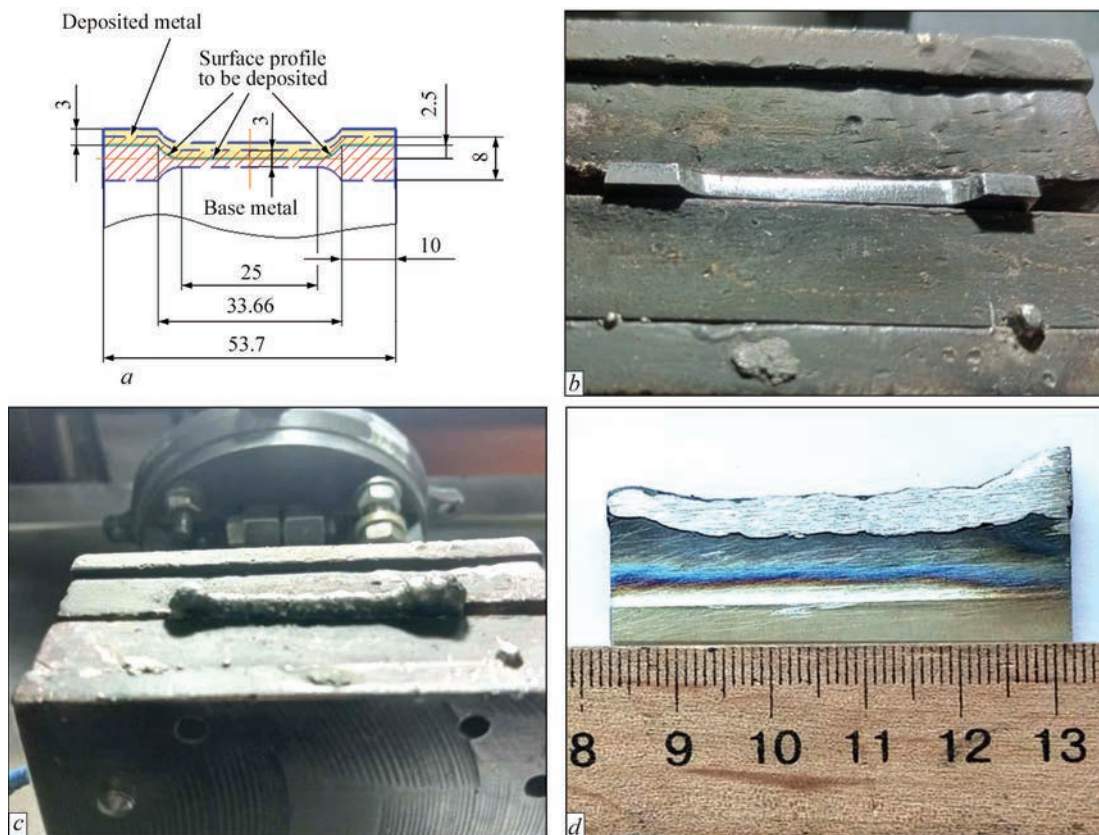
Features of surface preparation and technique of surfacing welded workpiece for welded joint “50 % of base — 50 % of deposited metal” made of HTNA: *a* — scheme of preparation of welded workpiece and cutting of the specimen for mechanical testing; *b* — preliminary formation of depression before deposition; *c* — appearance of a single-layer deposit; *d* — welded workpiece after partial removal of side reinforcements of deposited bead
